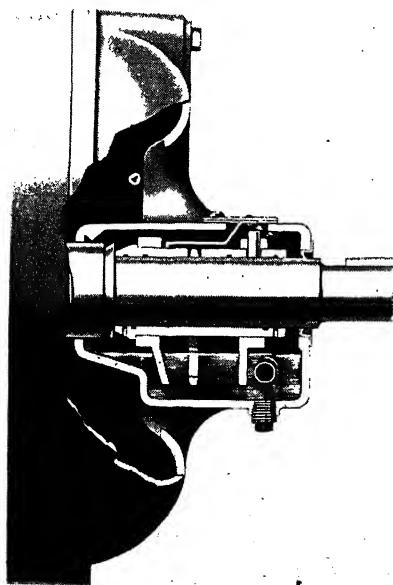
Sleeve bearing for electric motors, with lubricating-oil reservoir and oiling ring. (Courtesy of Louis Allis Company.)
